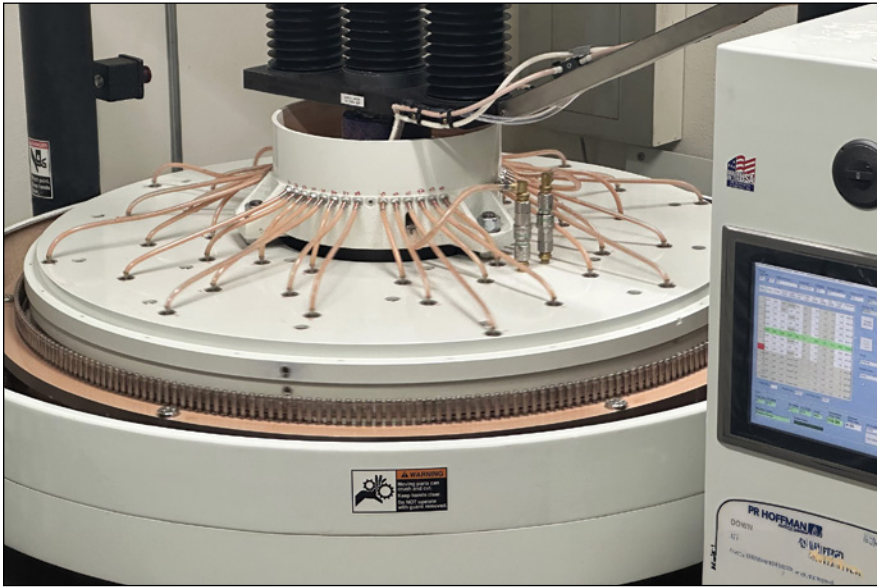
Shows the abrasive polishing compound being added via pink tubing between the parts and the platens.
